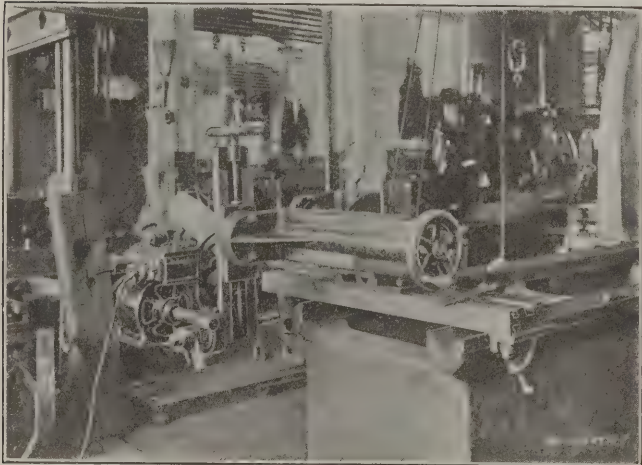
Motor-driven Portable Milling Attachment for Finishing the Ends of the Ways.
